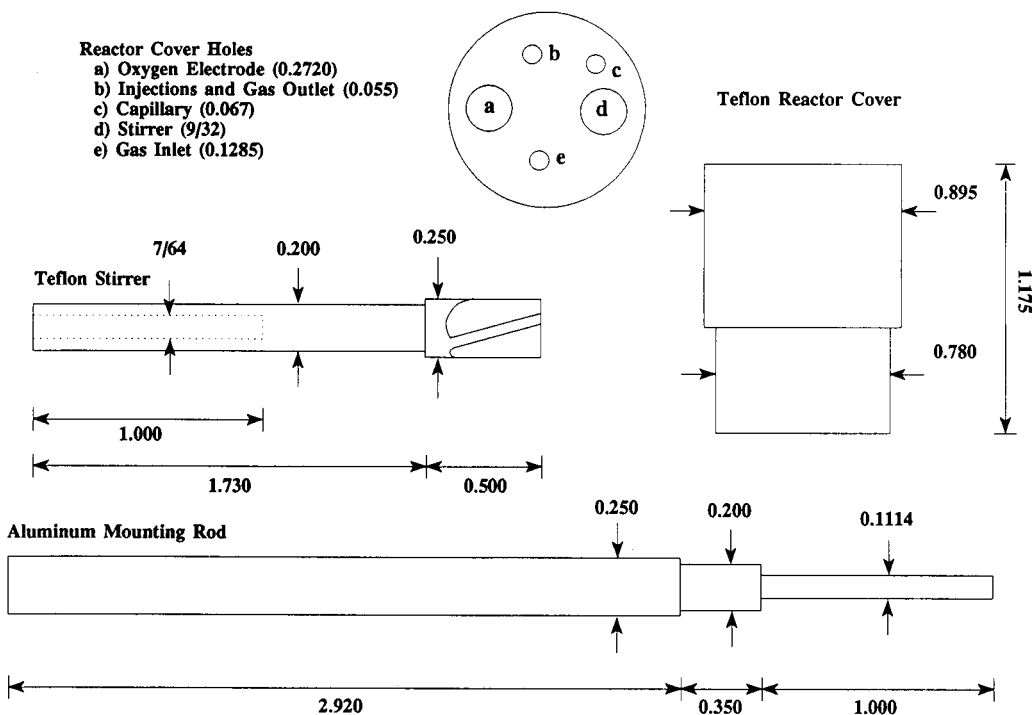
Design of stirring impeller and reactor cover. The stirrer is constructed from a PTFE impeller mounted on an aluminum rod. The impeller has four flutes, 90 degrees apart, and 0.040 in. thick. Each flute was cut at 15° from the rotational axis, and 15° from the plane of the first angle. The cuts were begun 0.4 in. from the stirring tip. Viewed from above, the flutes are cut to the left to impart a downward motion to the fluid when rotated clockwise. Dimensions shown are in inches. The reactor cover is made of PTFE with holes as shown.
